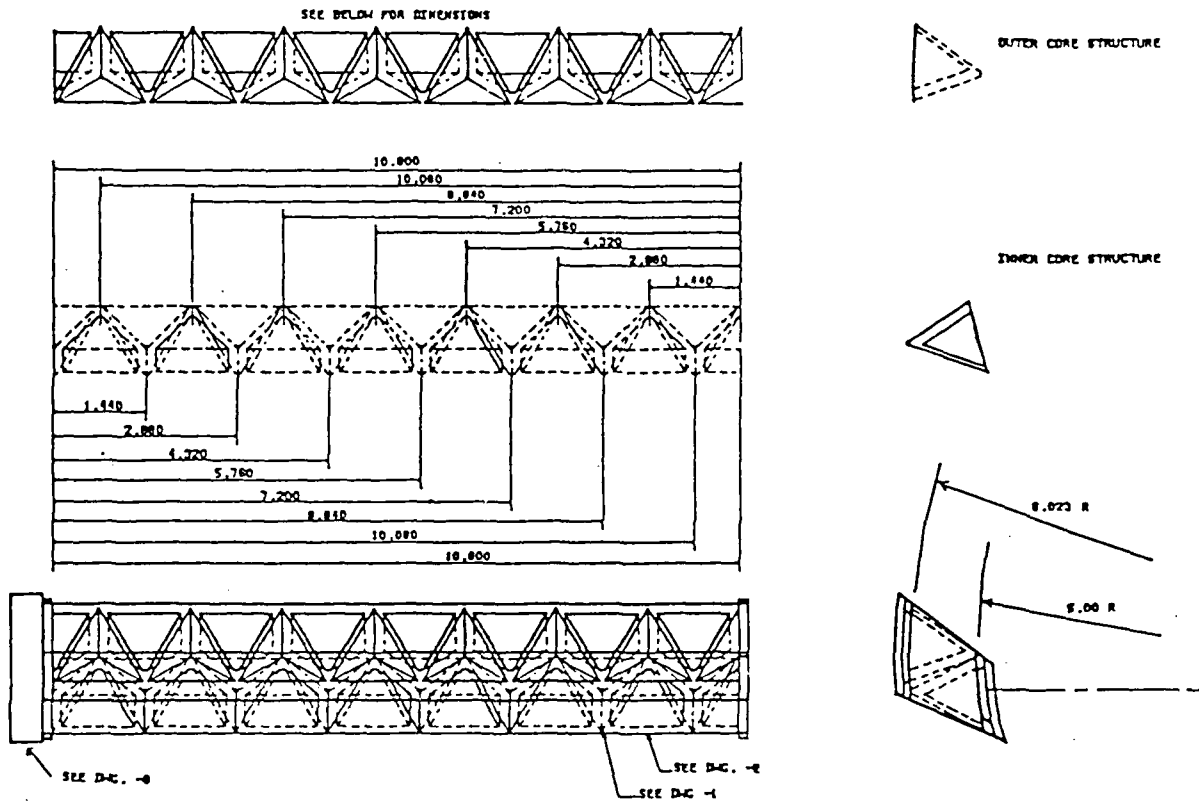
CYLINDRICAL PREFORM ASSEMBLY SEGMENTS
